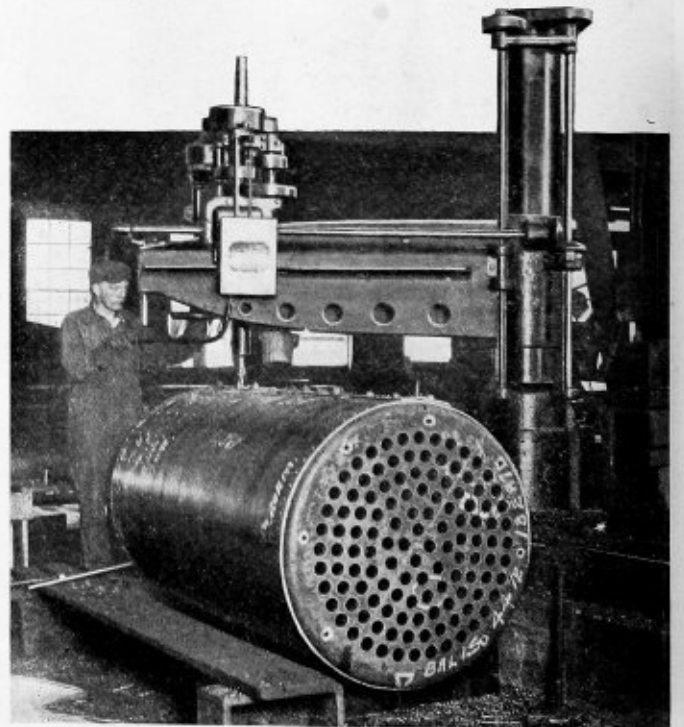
Reaming Rivet Holes in Assembled Boiler
